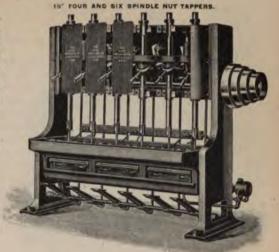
SHOWS SIX SPINDLE MACHINE.
